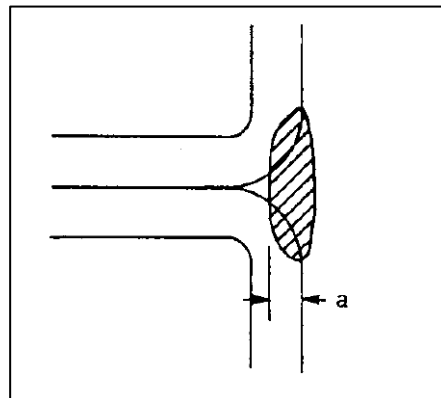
Design throat thickness of flare groove welds in rectangular structural hollow sections (*EN 1993-1-8 Fig 7.5 [3]*)
